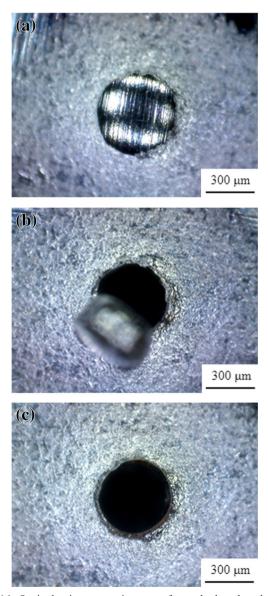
Optical microscope images of punched and embossed workpieces after a two, b three, and c four 2-mm-diameter flyer impacts
